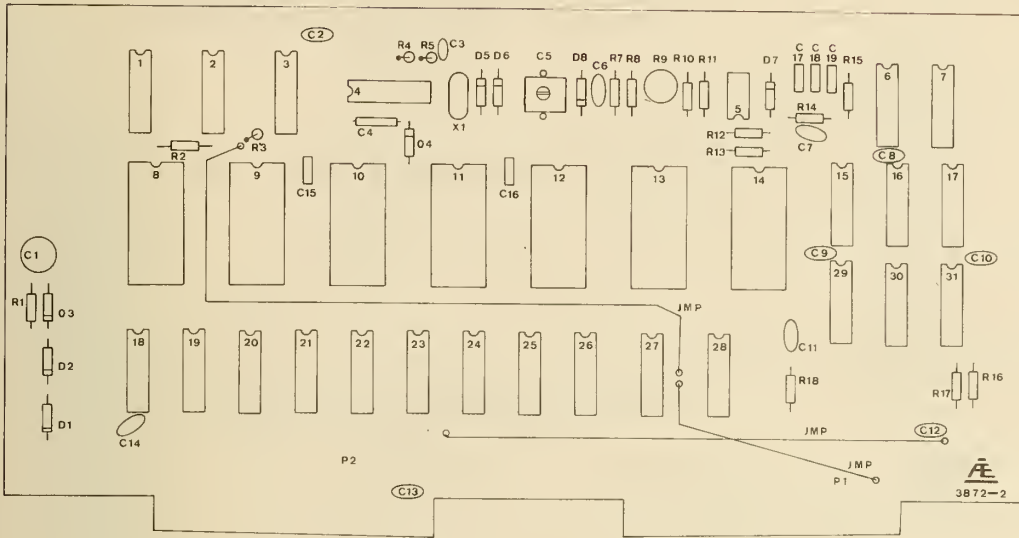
CLOCK BOARD COMPONENT LAYOUT
